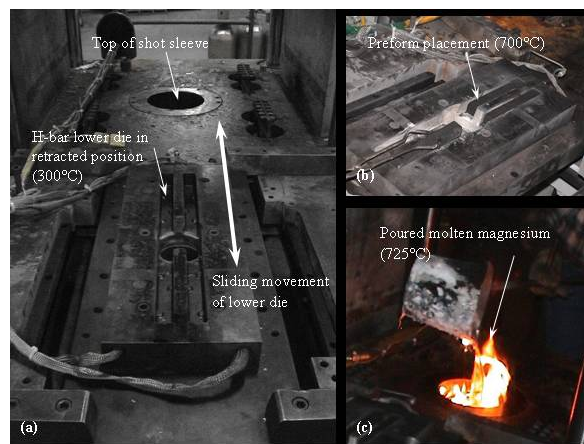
(a) Squeeze casting equipment with an H-bar die with (b) preforms inserted. (c) molten magnesium poured into shot sleeve.
